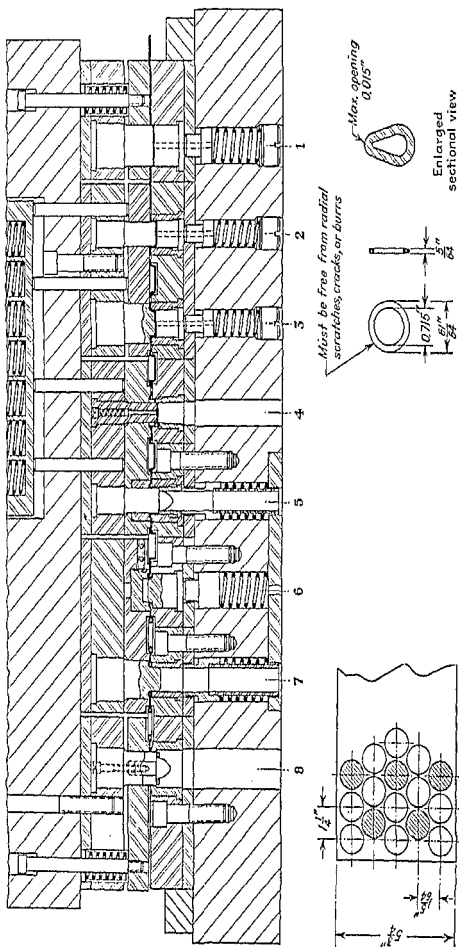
Progressive die for producing spark-plug seat gaskets. (AC Spark Plug Division, General Motors Corp.)
